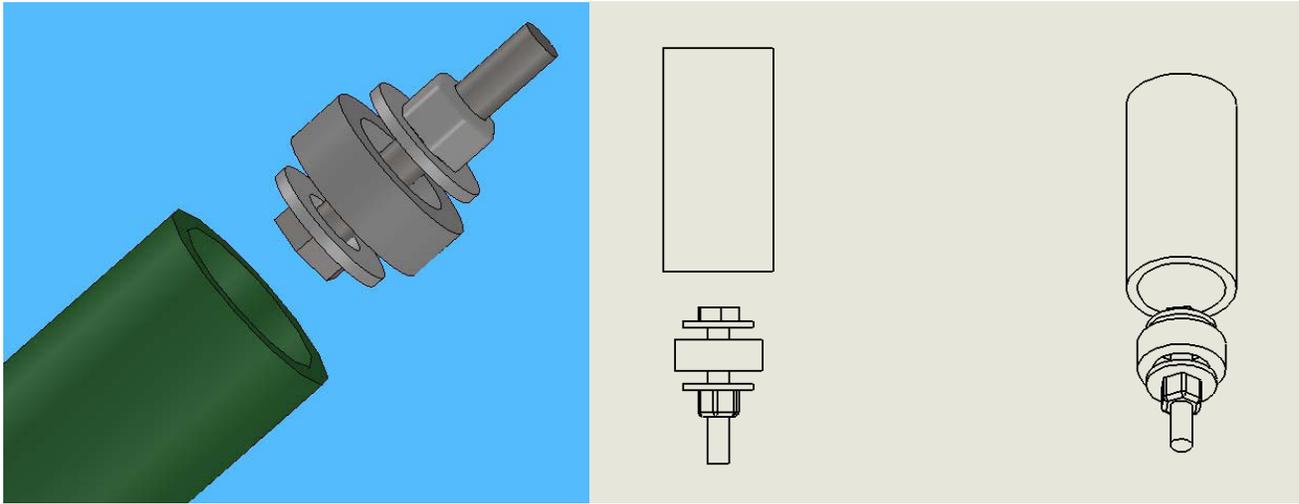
Initial Alignment Assembly. Shown here is the completed assembly for the initial knee alignment system. It is created from a ring of plastic, two washers, and a nut and bolt.
